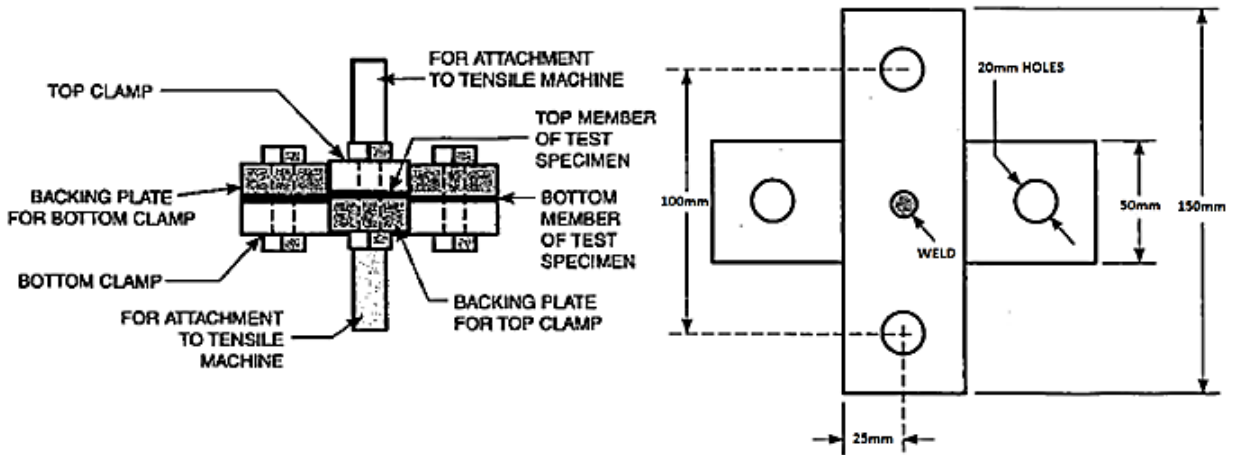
Cross tensile test setup: schematics and specimen layout [17, 18]
